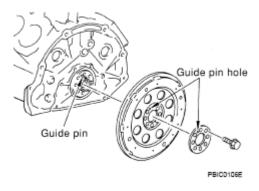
Identifying Guide Pin Hole And Guide Pin
